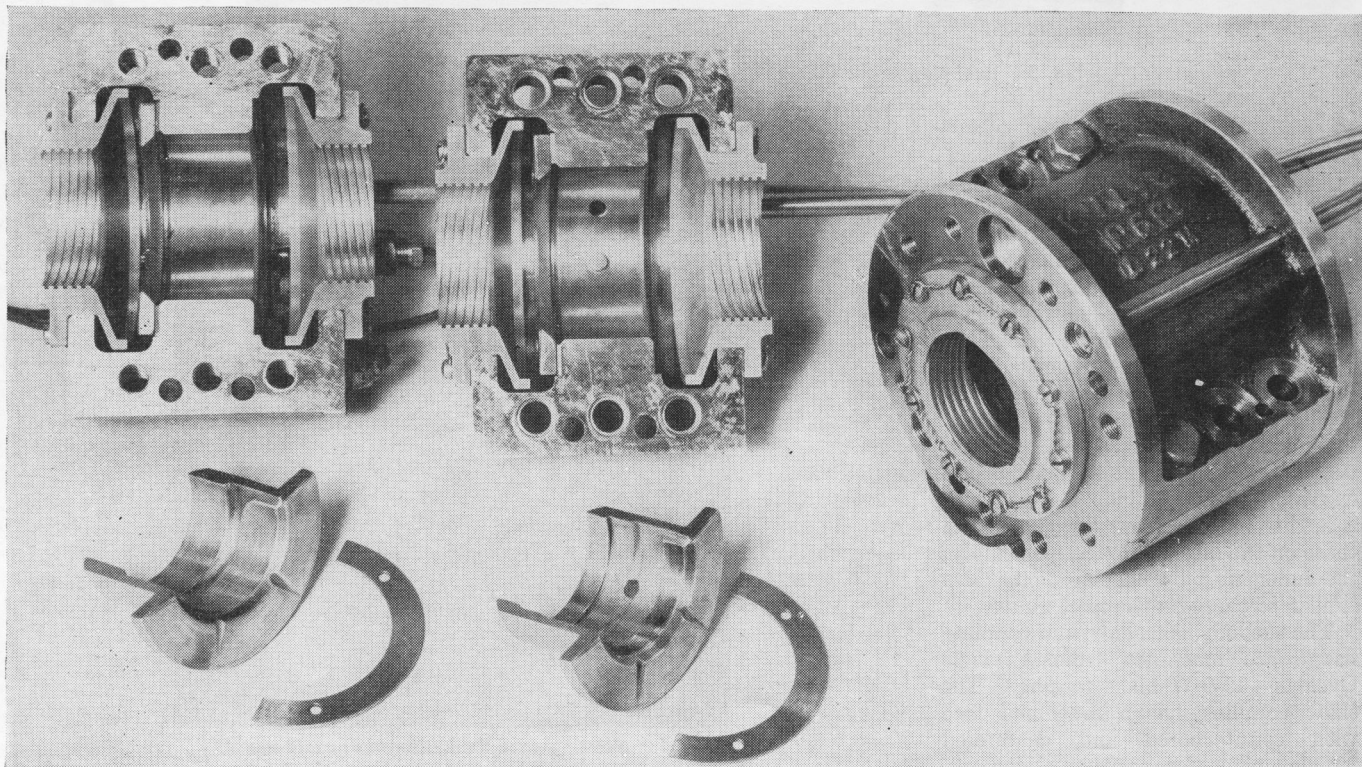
This exploded view (left) shows the thrust-bearing components, which are assembled at the right.
